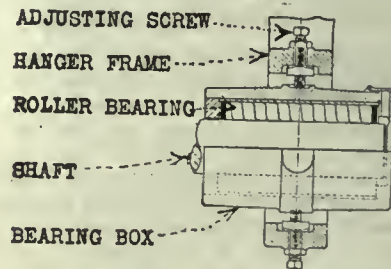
DETAIL OF A ROLLER BEARING SHAF THANGER.
